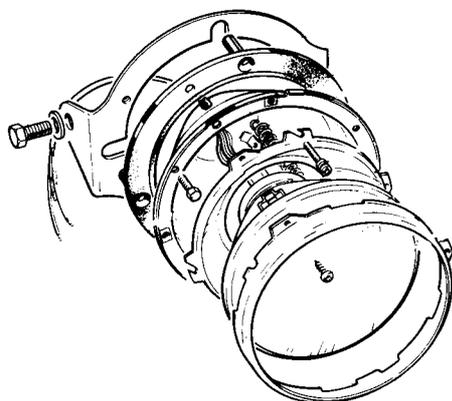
The Headlamp Unit - illustrating the method of mounting the light unit
